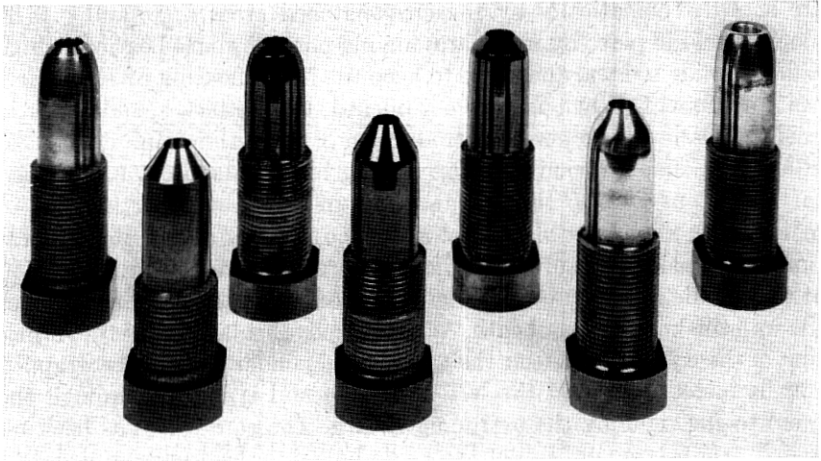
Some experimental dies and core-tubes. The three middle tools have baked on oil finish.
